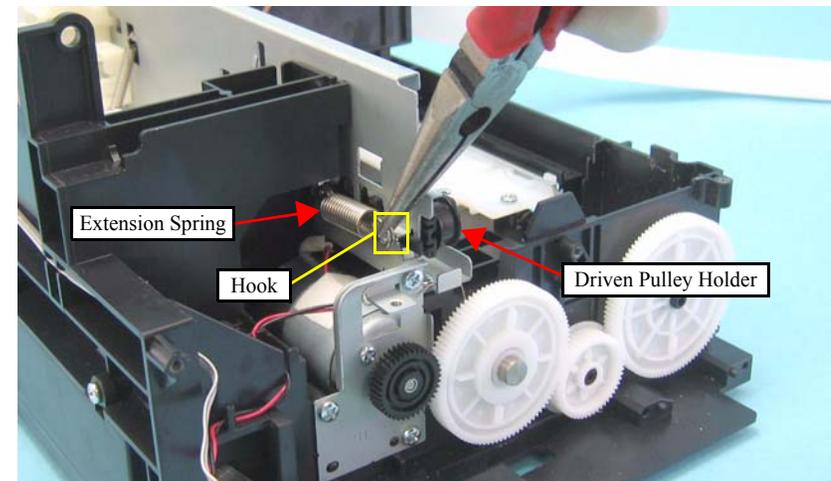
Removing the Extension Spring and Driven Pulley Holder
